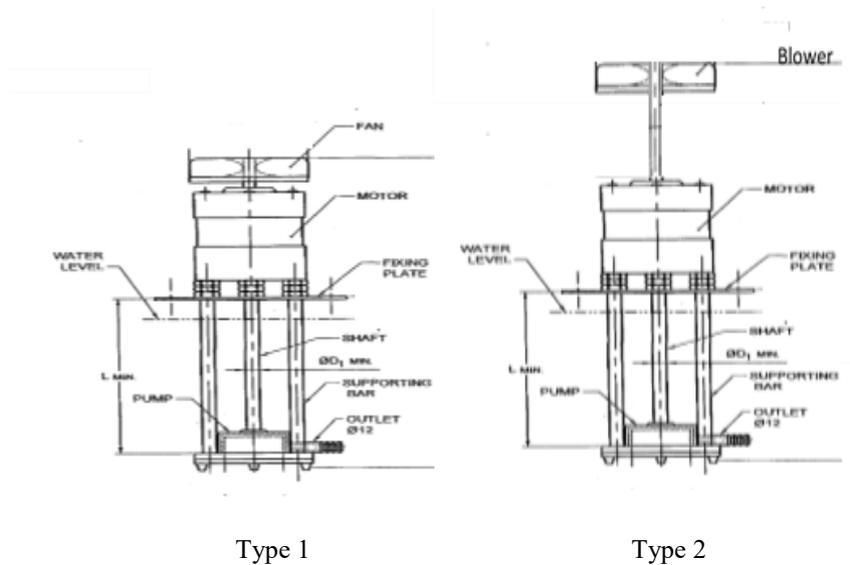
TYPICAL SECTION OF NON-SUBMERSIBLE PUMP
